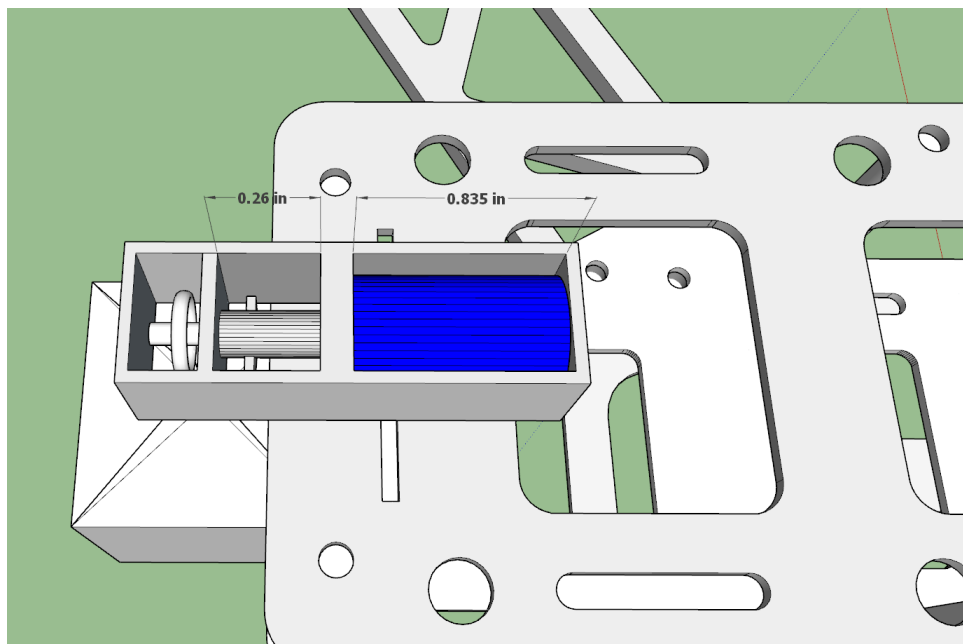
Trimble Sketch up Model demonstrating Solenoid Design op View
